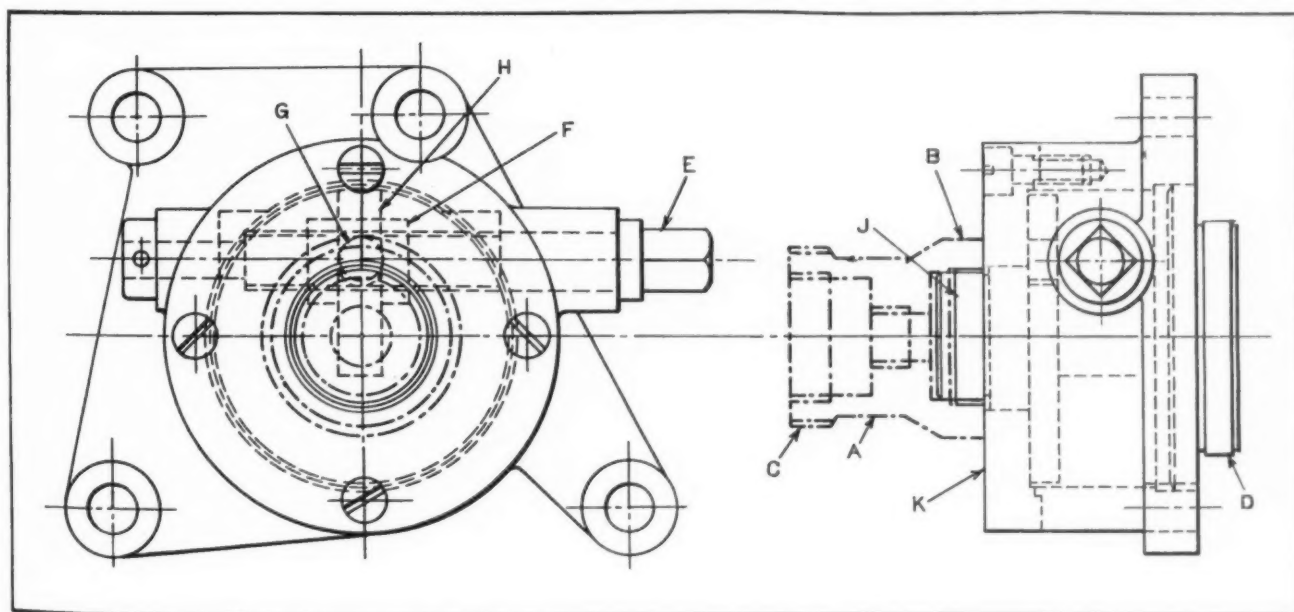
Fixture Used on Four-spindle Chucking Machine for Holding Part A
